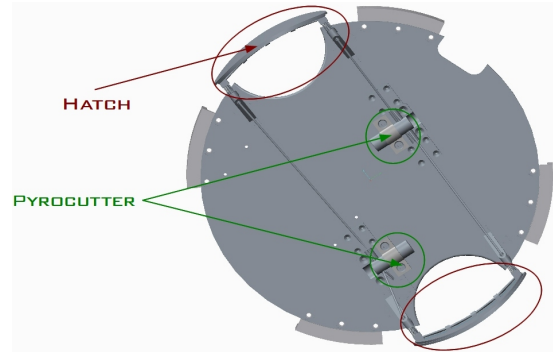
Ejection mechanism of the hatches, which cover the holes in the rocket module, the lock mechanism is re-lisied by a wire locking the hatches until ejection of the FFU
